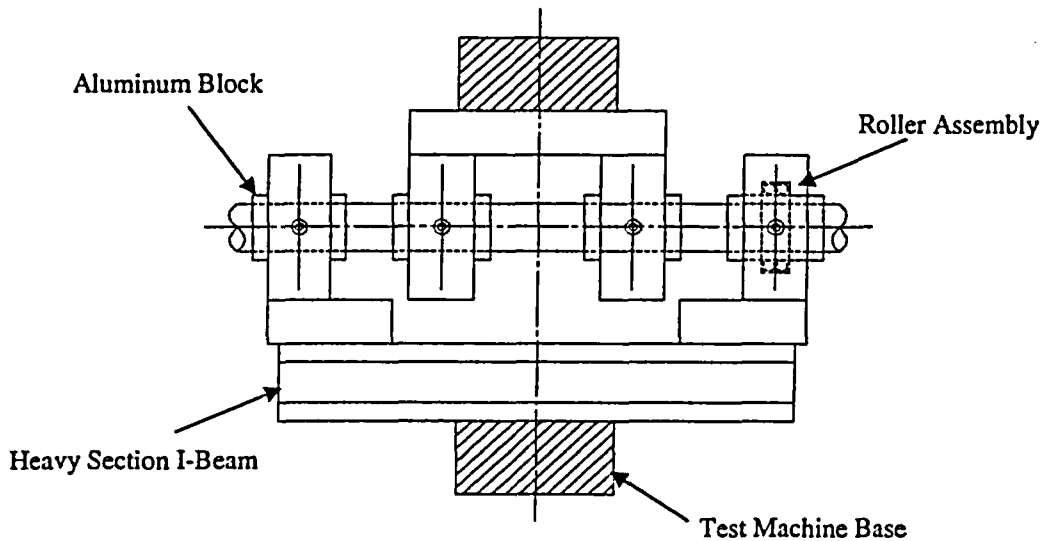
Loading fixture used in the surface-cracked pipe experiments
